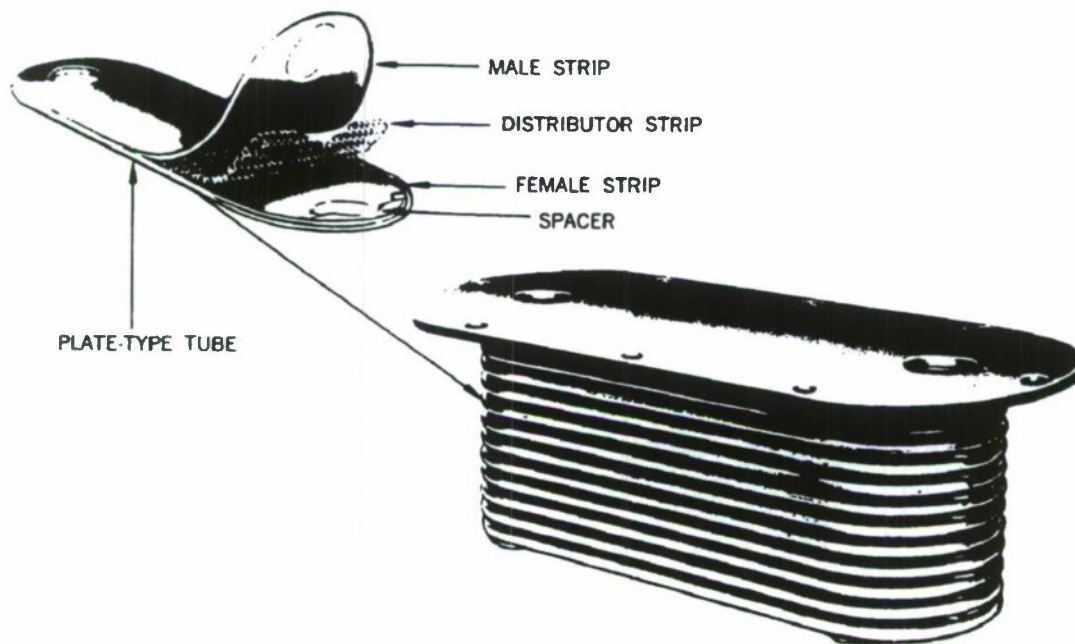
Typical Oil-to-Water Plate Type Core Assembly
